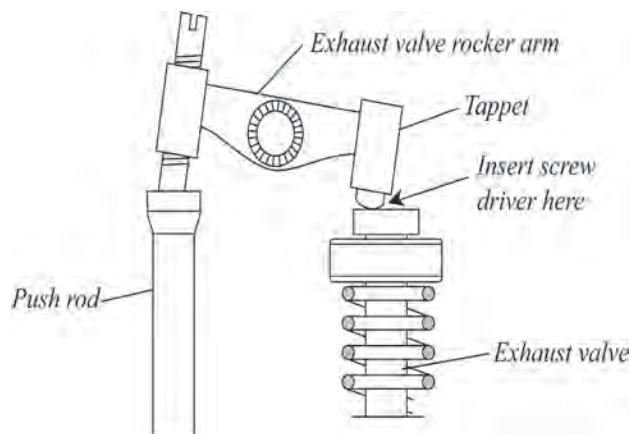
Exhaust valve assembly showing position to place screwdriver to dump compression.
